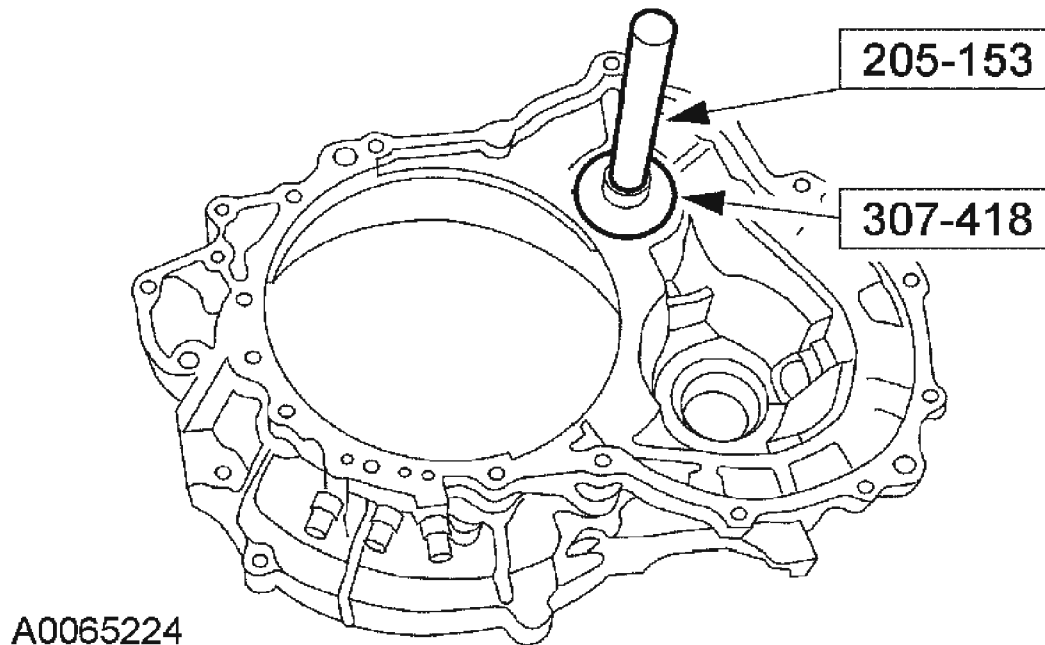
Installing Transfer Shaft Shim And Bearing Cup In To Converter Housing Using Special Tool
